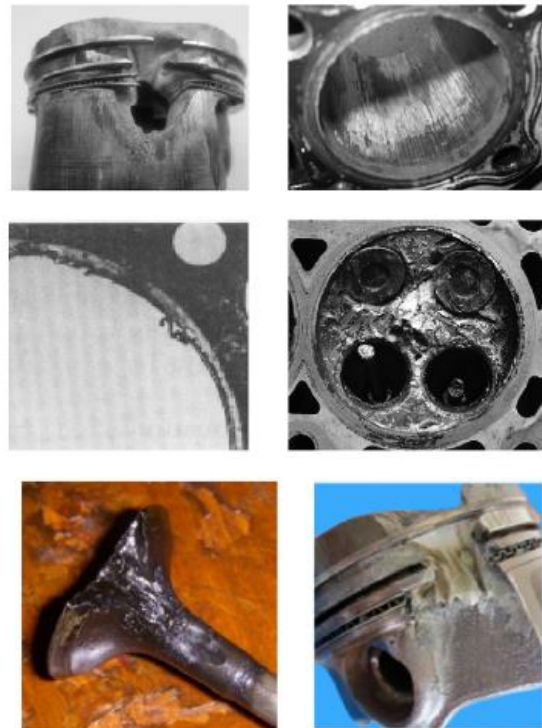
Typical engine damage due to abnormal combustion [30]
